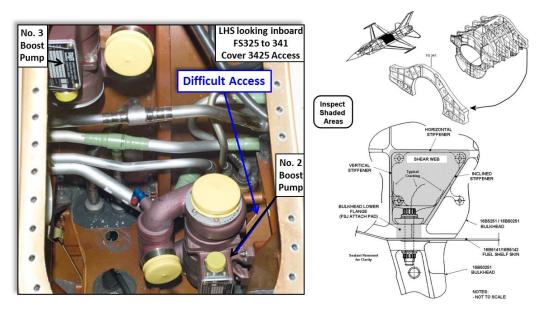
Difficult access to the fracture critical F-16 fuel shelf joint bolt holes at FS341 (left). Visual inspection for large cracks in flanges and web of the upper bulkhead is much easier (right) [10].
